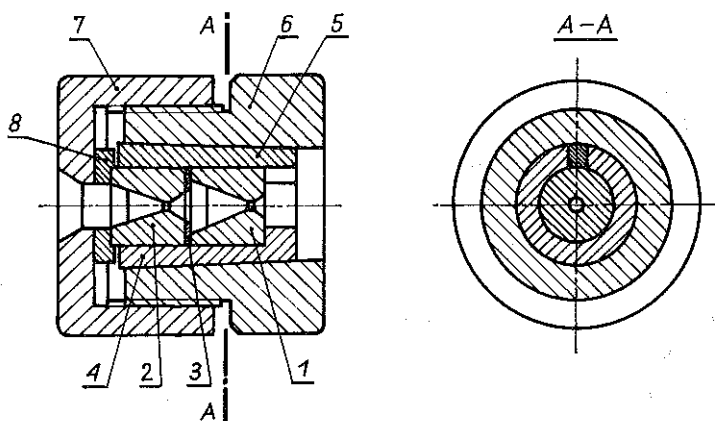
Improved compound die design: 1 and 2 - working and force feed hard-alloy inserts, 3 - thickening washer, 4 - collet, 5 - sealing insert, 6 - housing, 7 - flanged nut, 8 - thrust washer.
